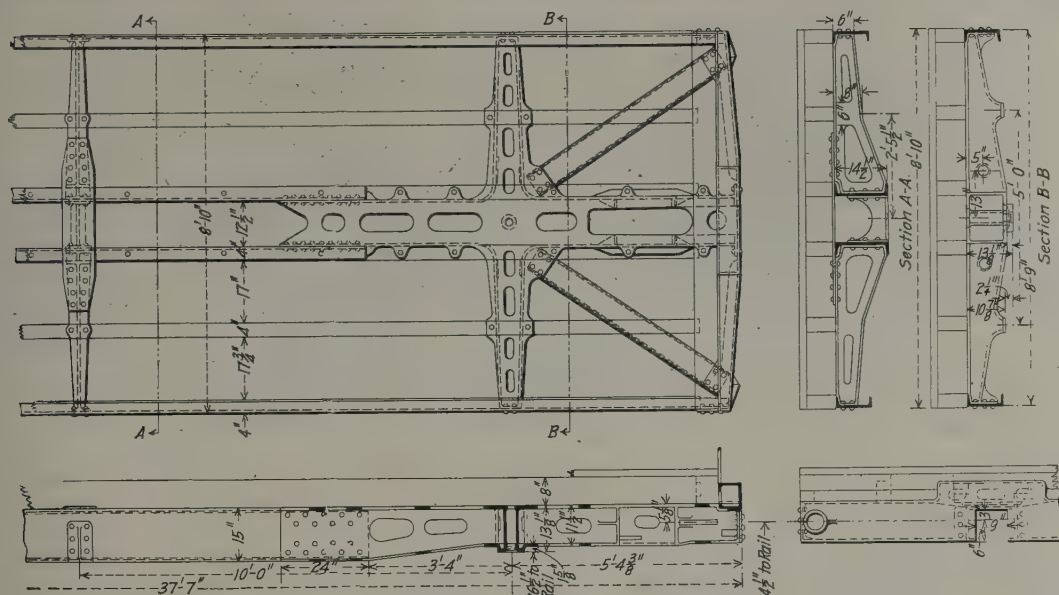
Steel Underframe for 40-Ton Capacity Box Car. Builder, Pittsburgh Steel Foundry Company.
